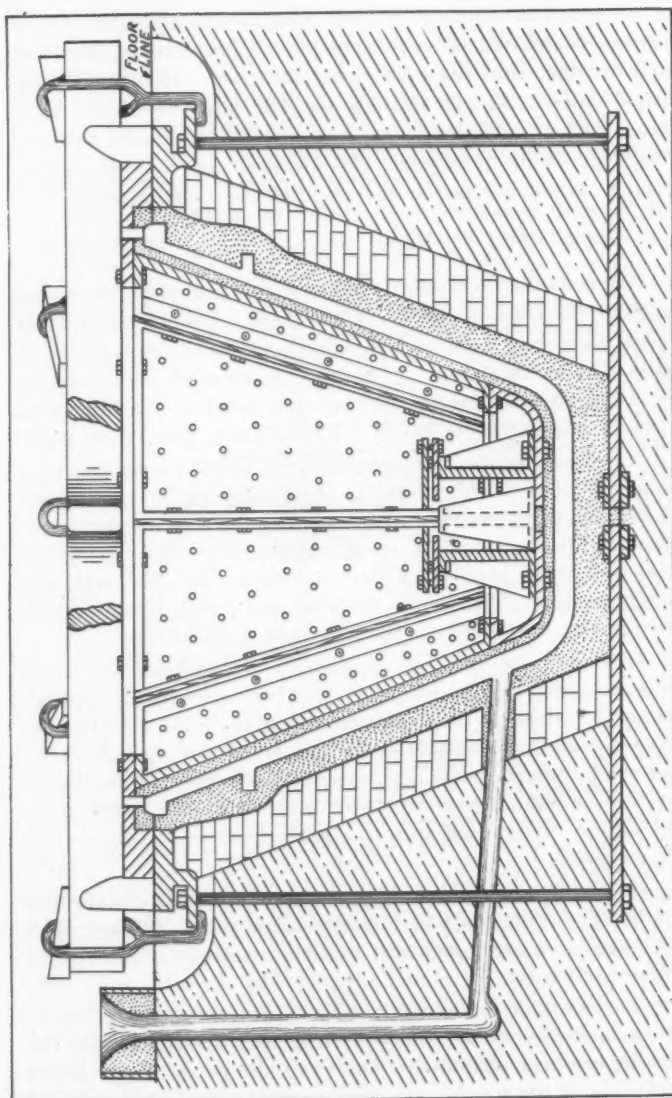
CROSS SECTION OF SLAG-POT MOLD
